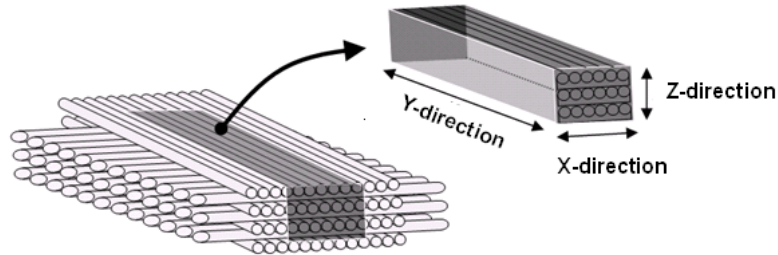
Machining direction of a test specimen from composites including carbon fiber yarn and sheets
